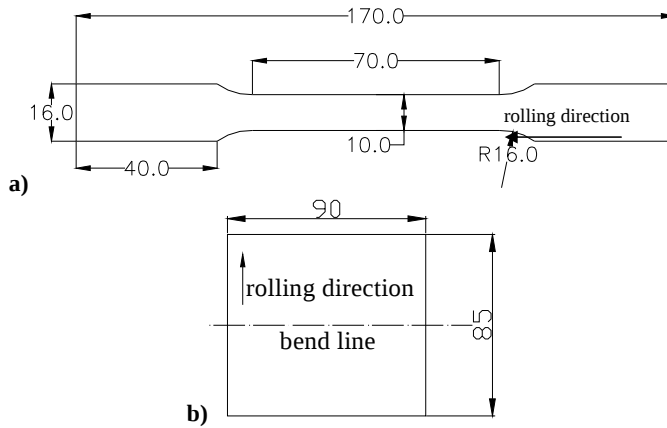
The geometry of the tensile test (a) and air bending (b) specimens.
